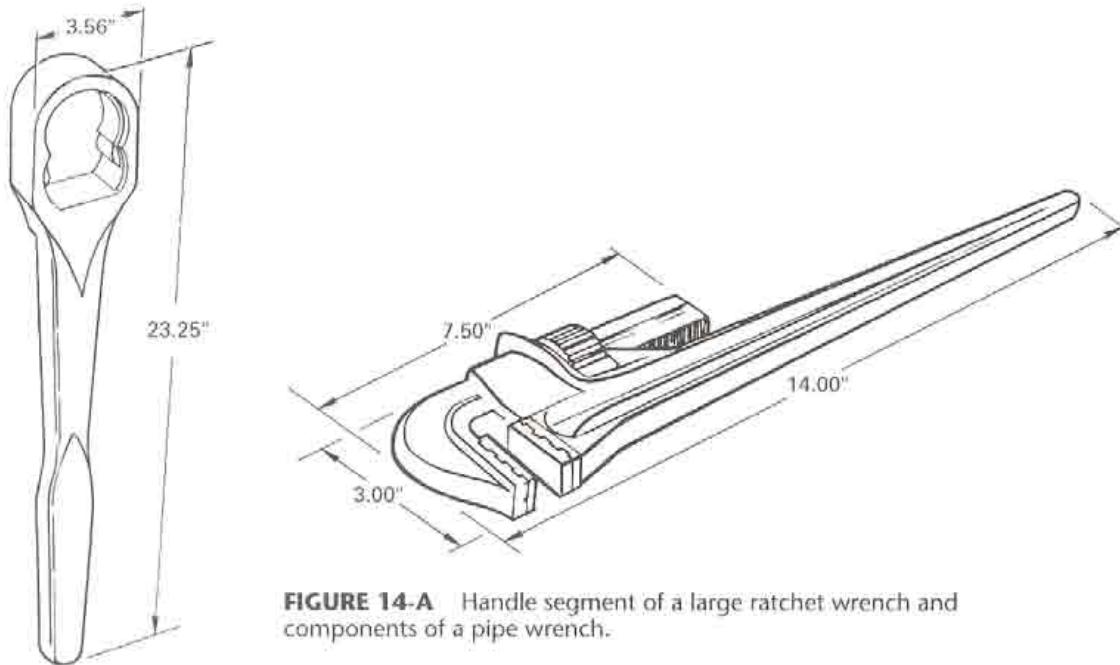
A Handle segment of a large ratchet wrench and components of a pipe wrench.
